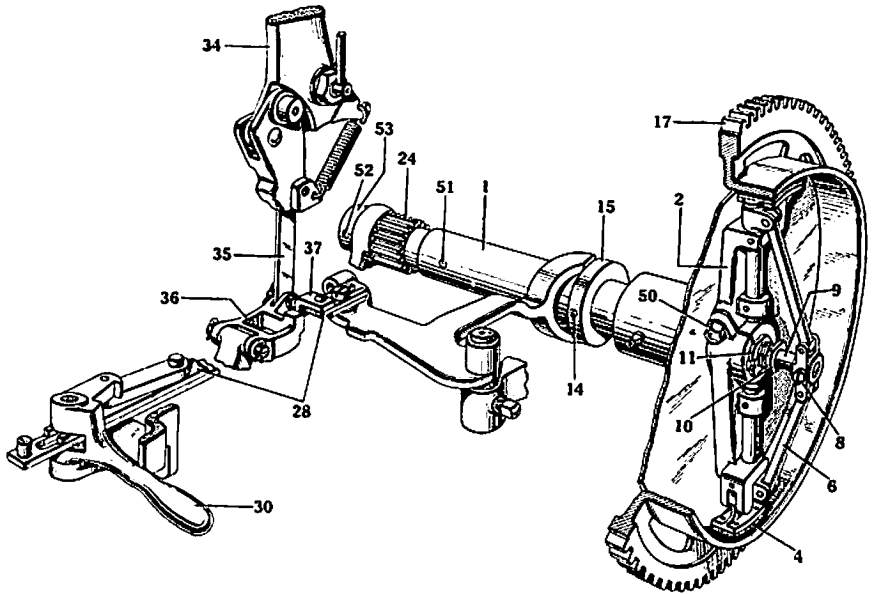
Starting and Stopping Mechanism and Mold Disk Slide Safety Lock. The safety lock 36 prevents operation of the machine when the mold disk slide is disengaged from its cam. When the mold cam lever is raised, lock 36 is automatically raised in front of block 37 on rod 28. This makes it impossible to pull the starting lever 30 forward. When the mold cam lever is lowered to reconnect the mold disk slide with its cam, lock 36 is lowered and the starting mechanism is free to be operated.
